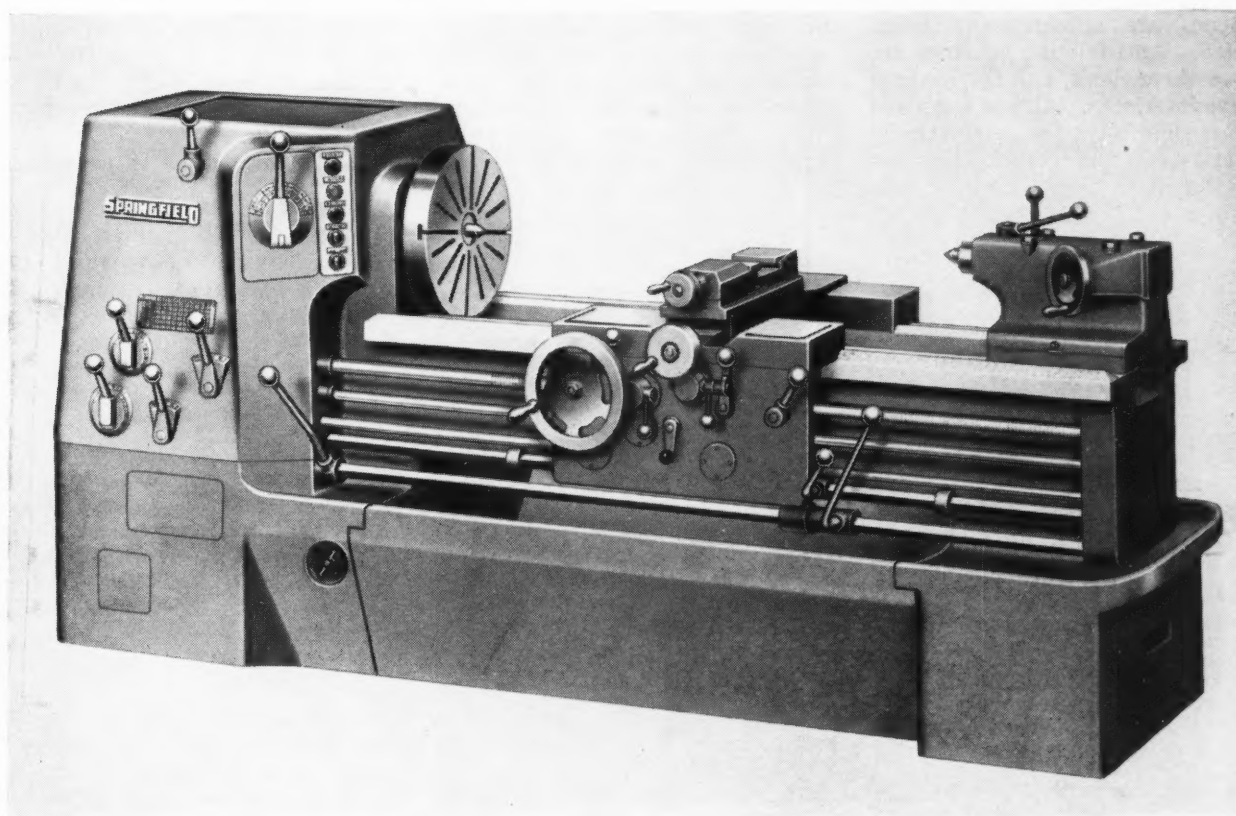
Heavy-duty lathe of radically new design announced by the Springfield Machine Tool Co.
